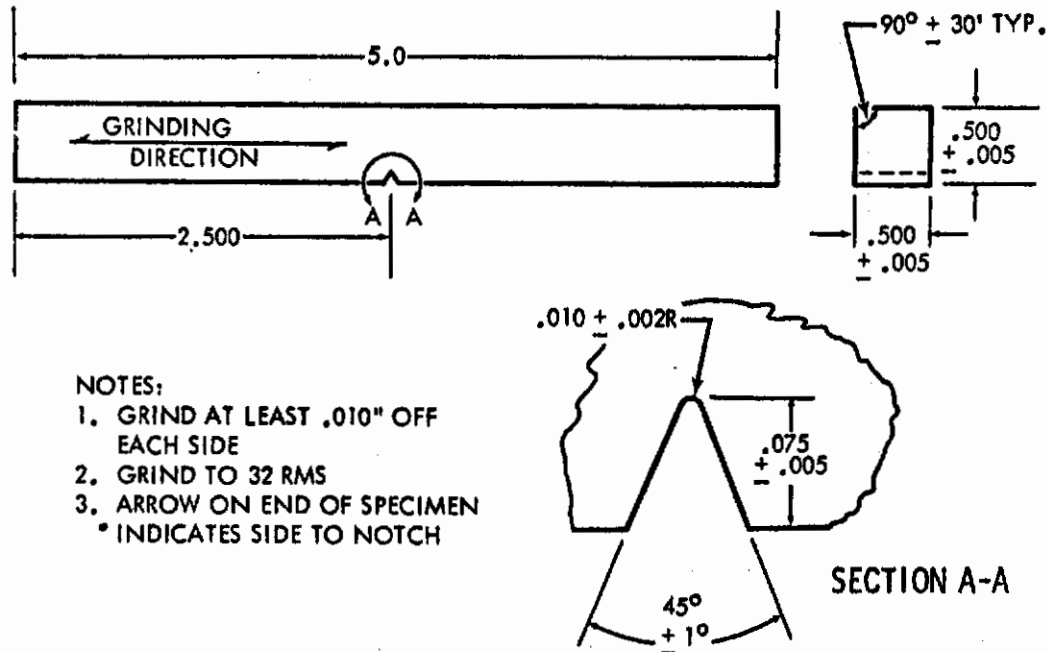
FRACTURE-TOUGHNESS SPECIMEN
